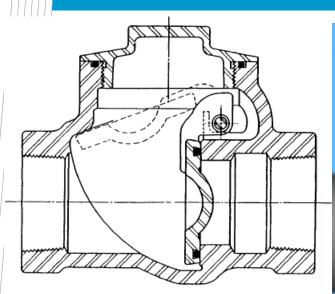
Swing check valve. (Courtesy of Judd Valve Co., Inc.)
